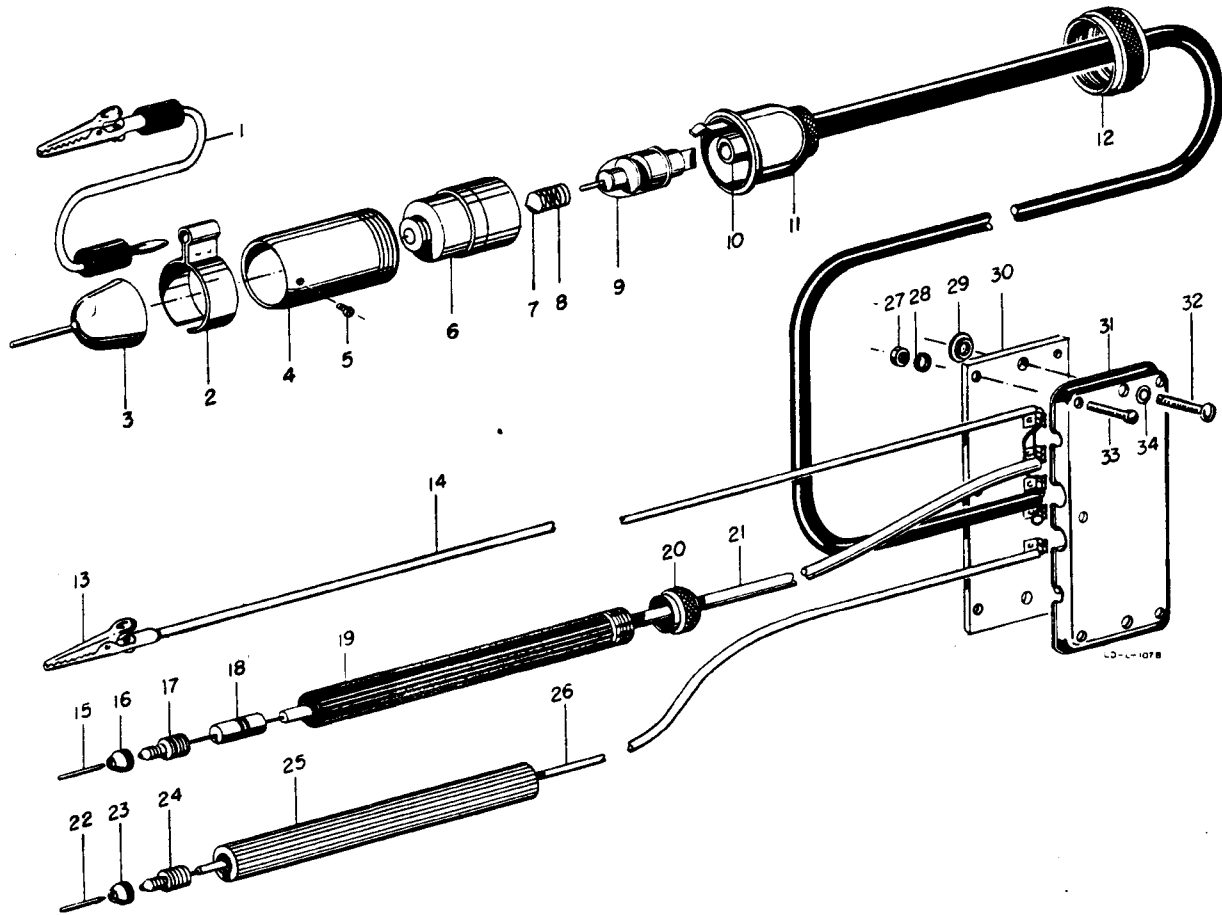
Test Probe Assembly, Including Exploded View of AC Probe
